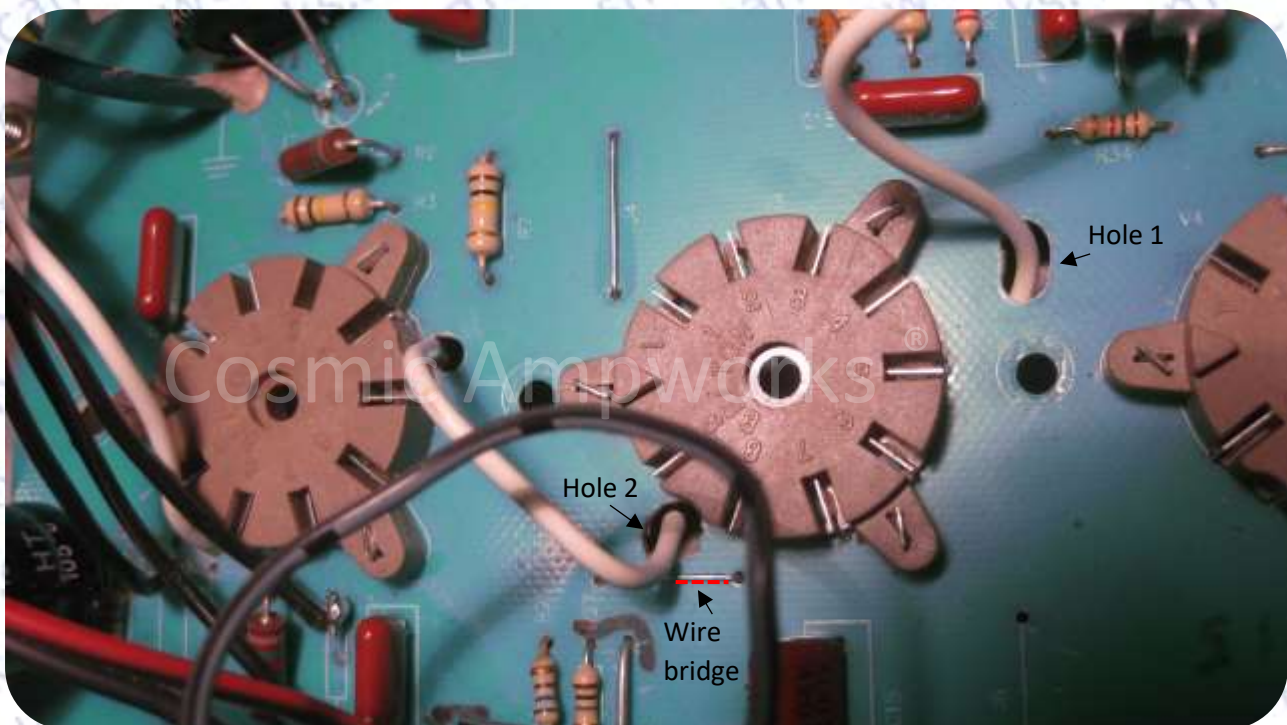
Drill two holes near the second preamp tube: hole 1 right next to the tube socket connections to pins 4 and 5 (Figures 23 and 24); the location is not particularly critical. Drill hole 2 just above the tube socket solder connections of pin 9, but make sure not to accidentally drill through the wire bridge! Drilling is best done from the underside of the board. Note: don't pay attention to the other components – this picture was also used for the classic HB15 mod kit.
